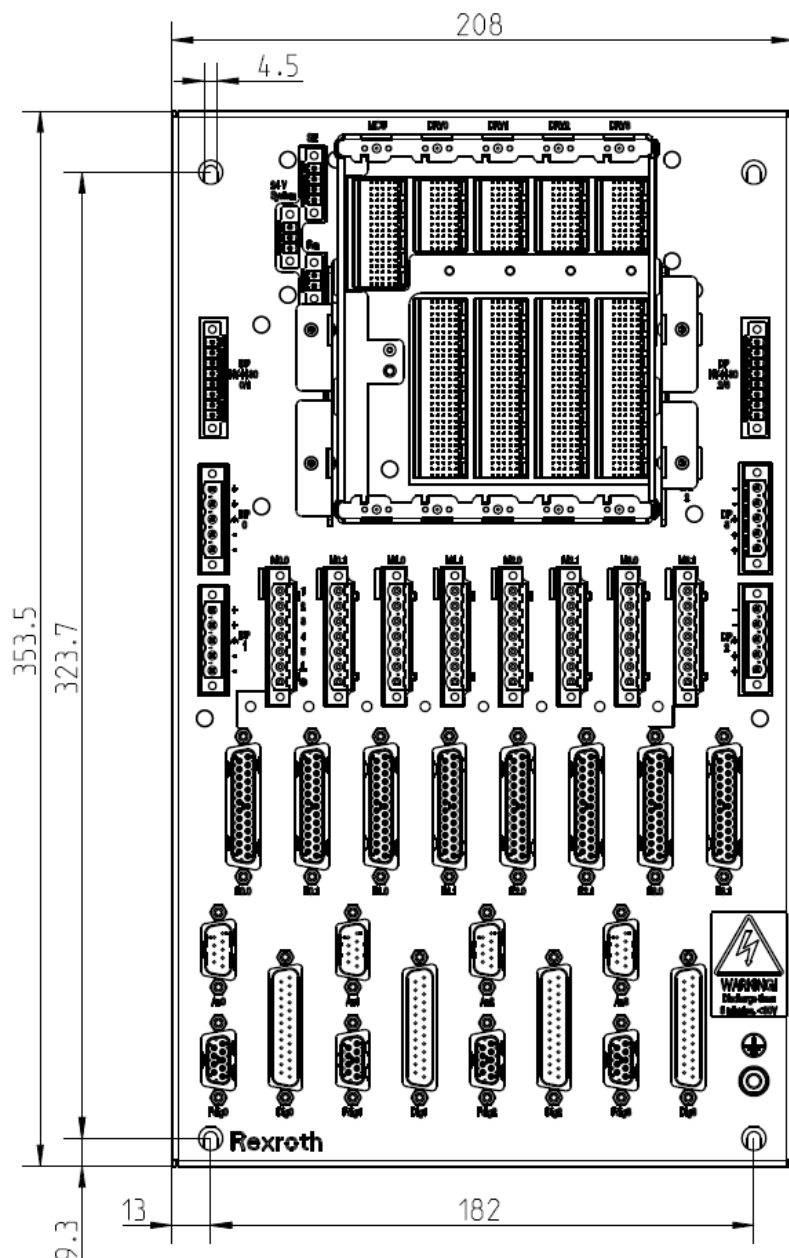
Dimensions (front view) of the NYS04.2-ST-04-ULNN-NY4043
